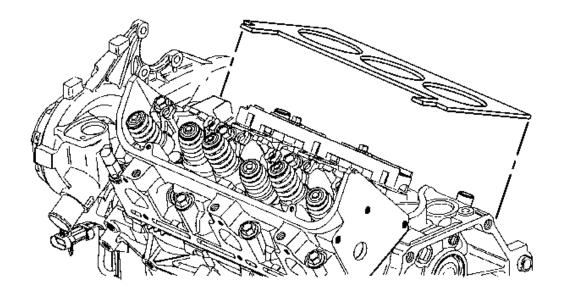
Removing Right Cylinder Head Gasket Courtesy of GENERAL MOTORS CORP.
